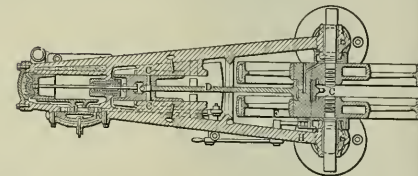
HORIZONTAL SECTION OF FIRST ENGINE
